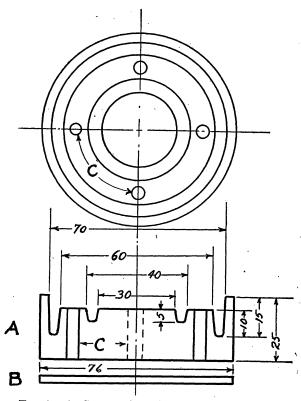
A. Cross-section of mold. B. Circular metal plate for support of rods in holes C. Dimensions in millimeters.
